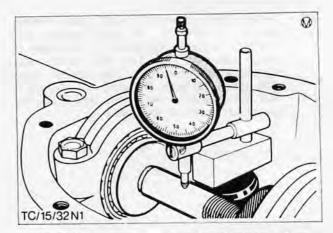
Dial indicator reading 95 – shim under master pinion too thick
